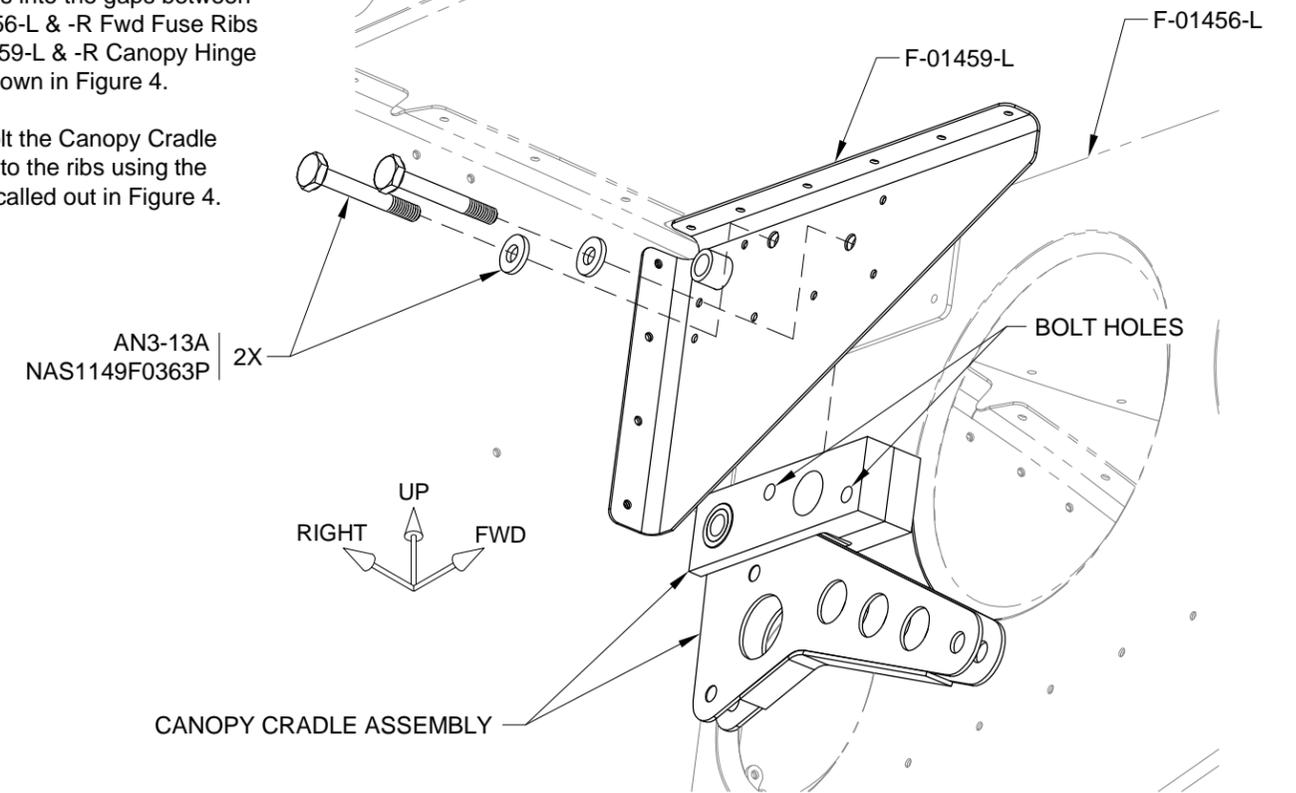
INSTALL CANOPY CRADLE ASSEMBLY
